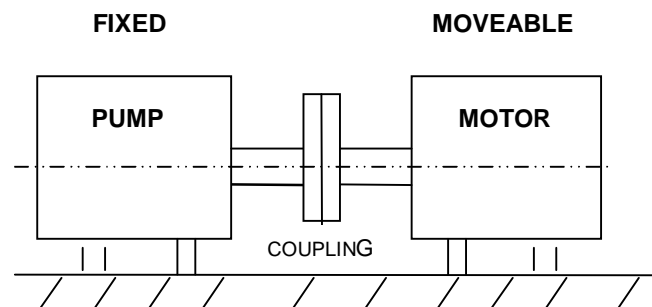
Block diagram of typical machine set comprising motor and pump
